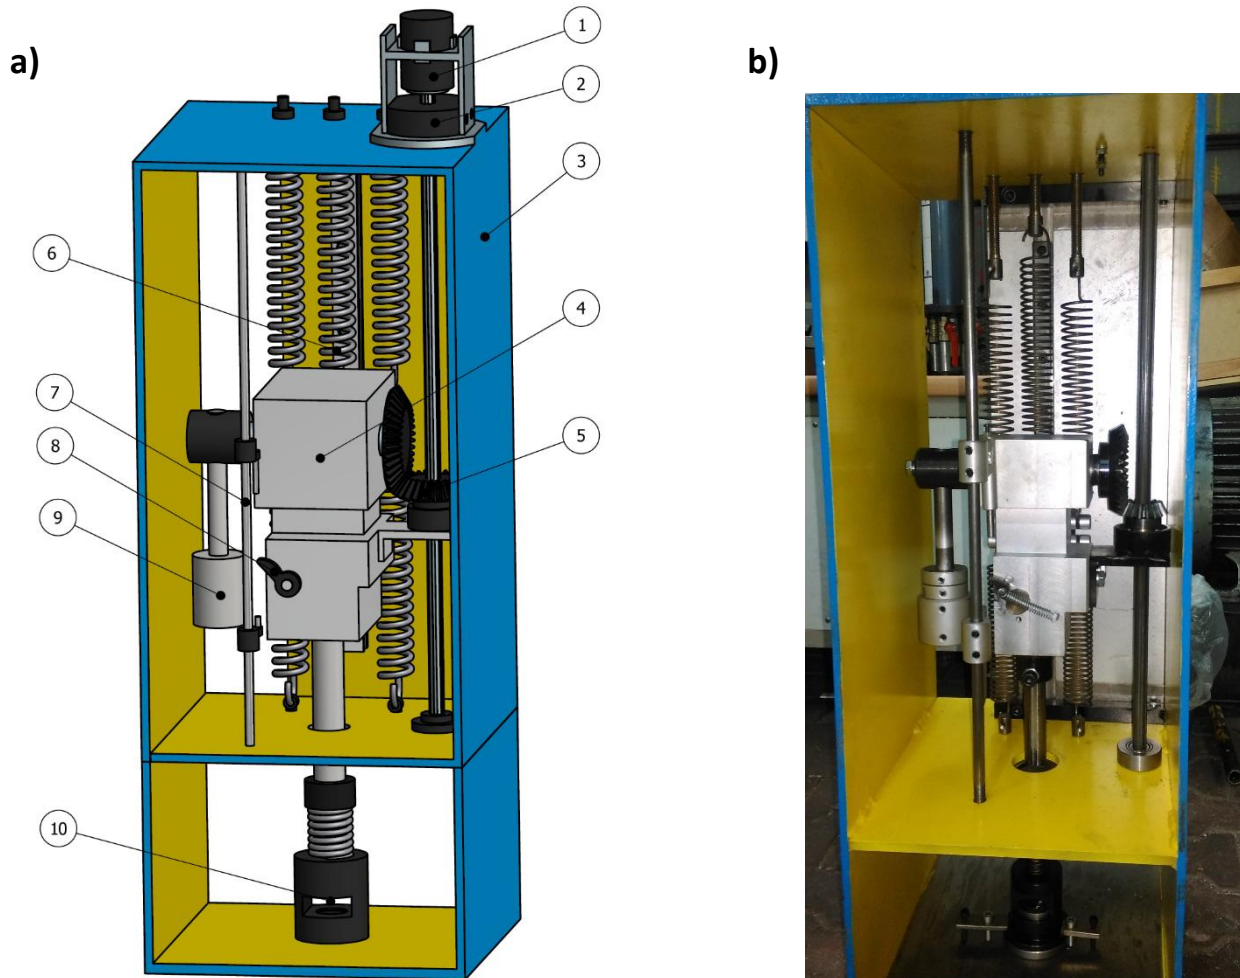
Prototype solution of the punching machine a) 3D model: 1-electric motor, 2-gearbox, 3-housing, 4 – oscillator mass, 5-bevel gears, 6- set of springs, 7- punch clutch triggers, 8- clutch engage switch, 9- rotational mass, 10- punch, b) photo.
